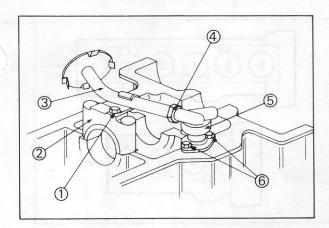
Oil Pump Removal/Replacement - Engines Not Fitted With High Inclination Oil Pans
